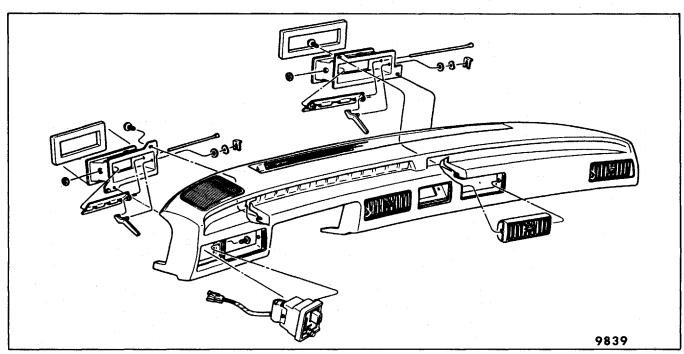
Windshield Wiper Switch Installation Cadilac K Style
